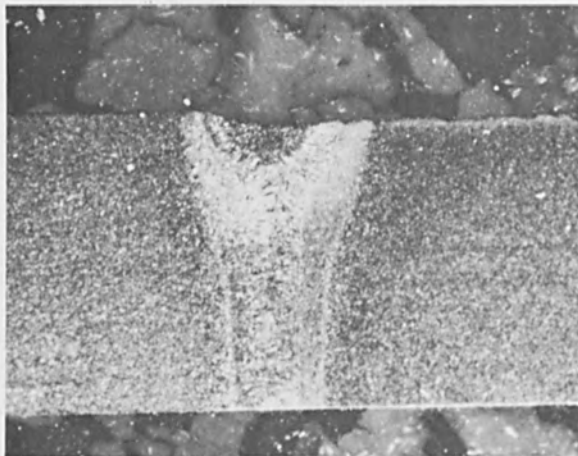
Typical weld configuration in .171 gage with .005" gap of 17-4PH weldment.
